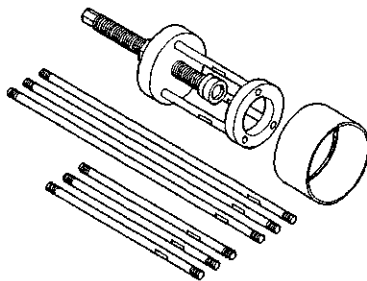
Crankshaft Sprocket Puller Tool 6444
